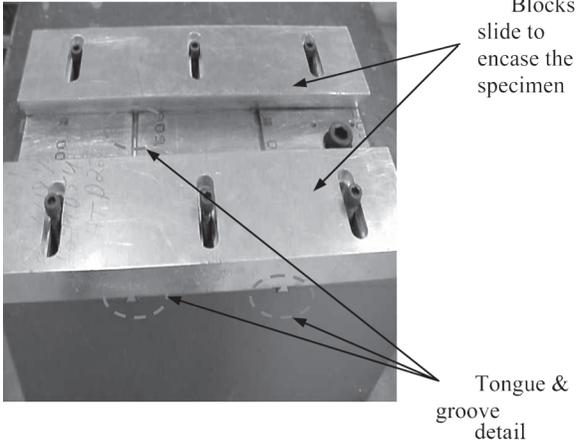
Single Contour Cantilever Beam Specimen Fixture
